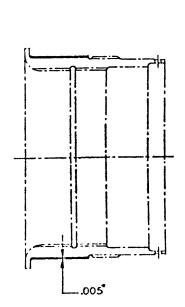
Crankshaft Rear Bearing Parts No. 25088, 64836
